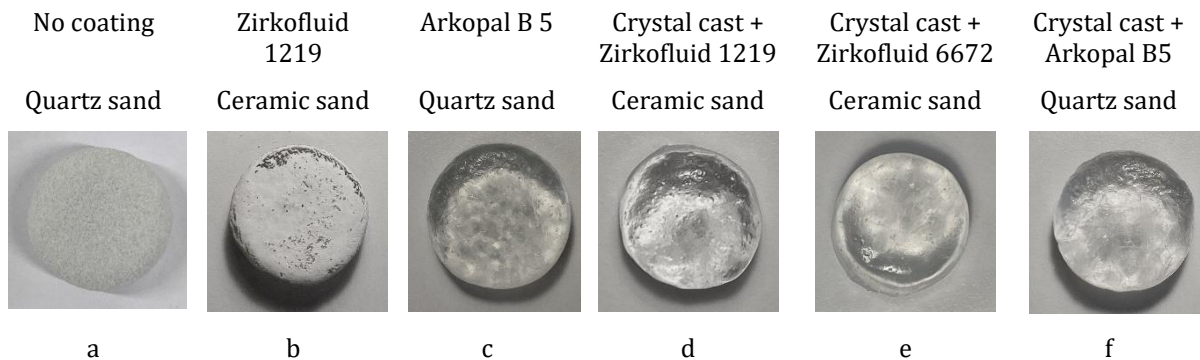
Glass surface of glass specimens kiln-cast at 870°C in coated 3D printed sand moulds.
